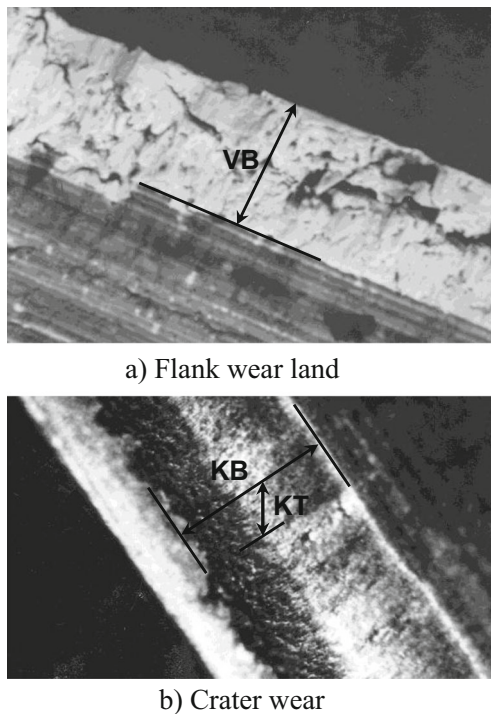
Typical wear of the cutting tool (a flank wear land and b crater wear)
